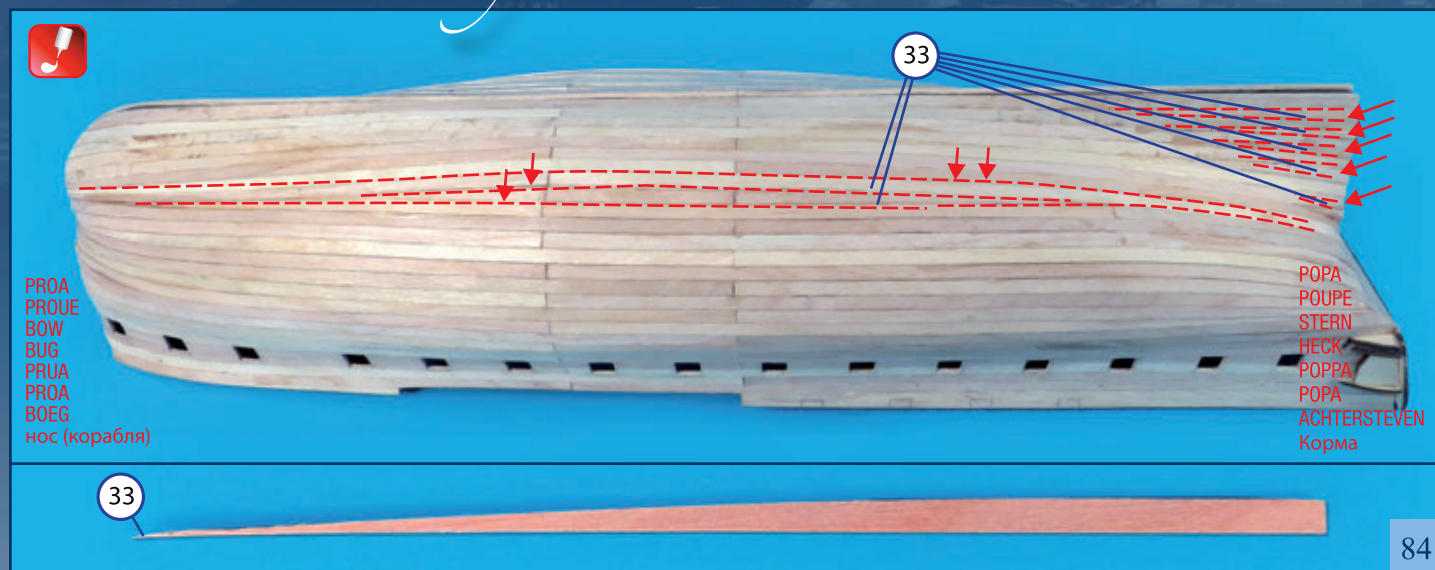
B - 83C: Planks 33 at the stern will be glued copying the curved shape of the frame 12 and parts 22 and 23, until they meet the planking 33 at the stern.
